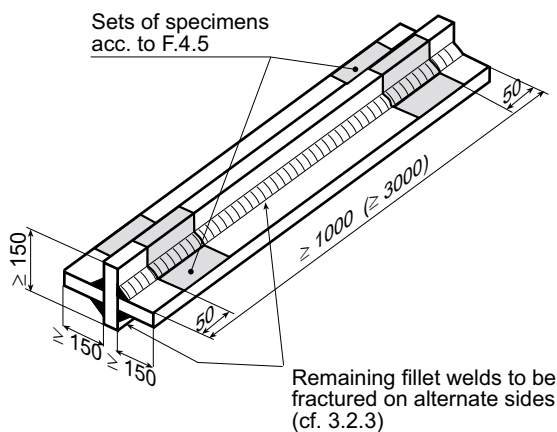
Double T-joint (cruciform) test piece for fully mechanized welding processes
